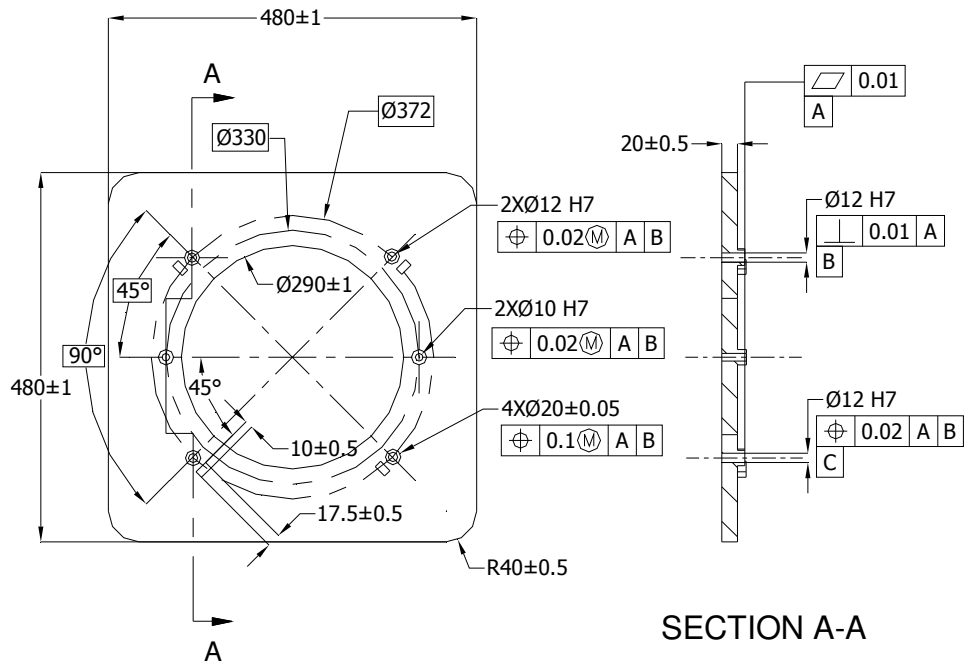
Tail Cone Assembly Fixture, Assembly Drawings (continued)
